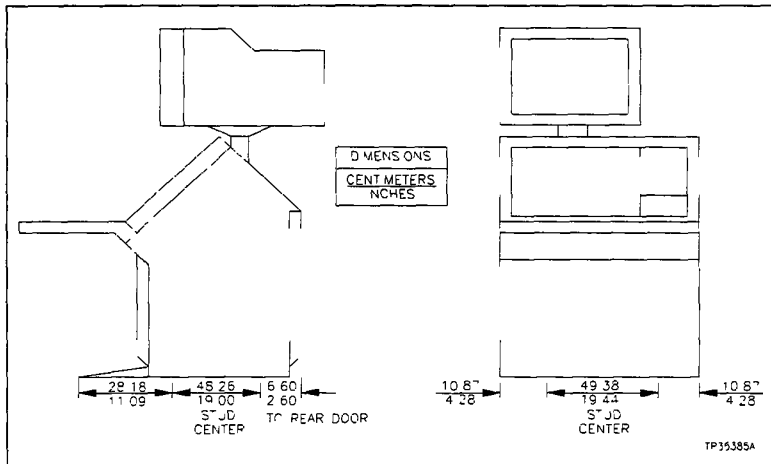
12 IIIC201/2/3 Anchoring Dimensions
